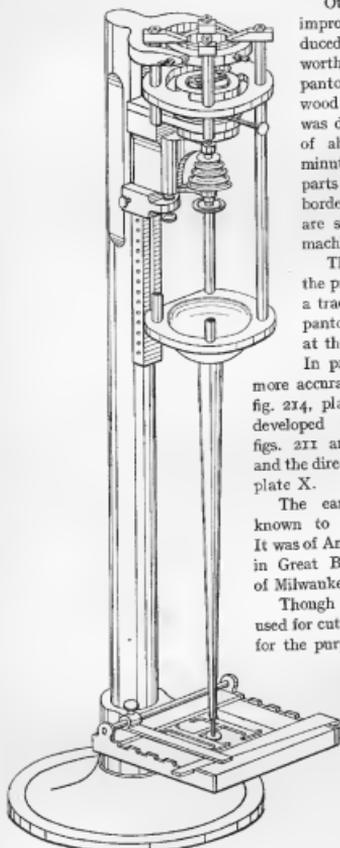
Original Benton punch-cutting machine; from patent specification.
